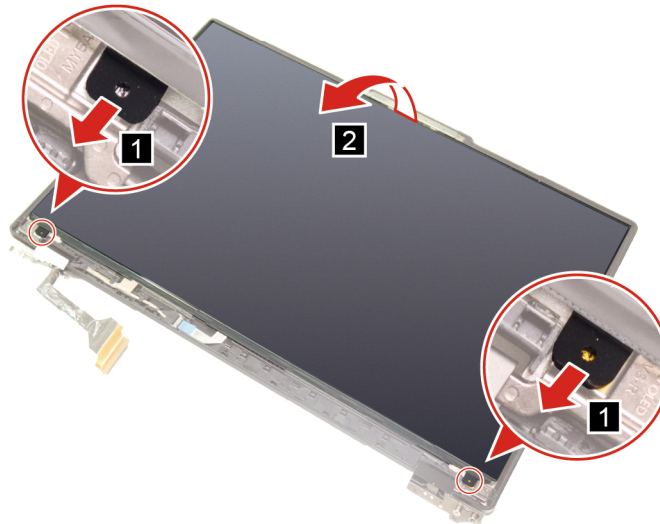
Pull out two pieces of the removable tape and turn over the LCD panel
